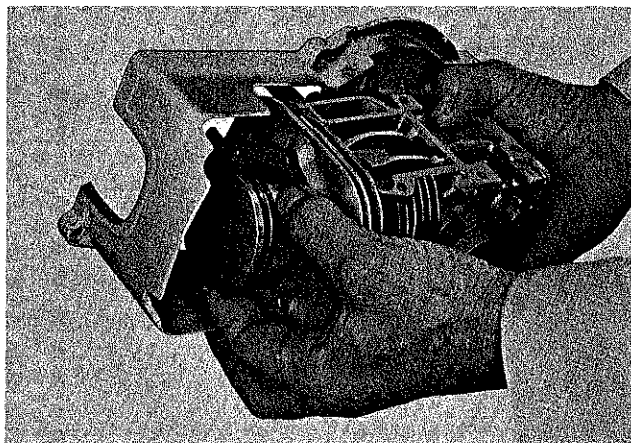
Removing the piston and connecting rod assemblies from the cylinder.
